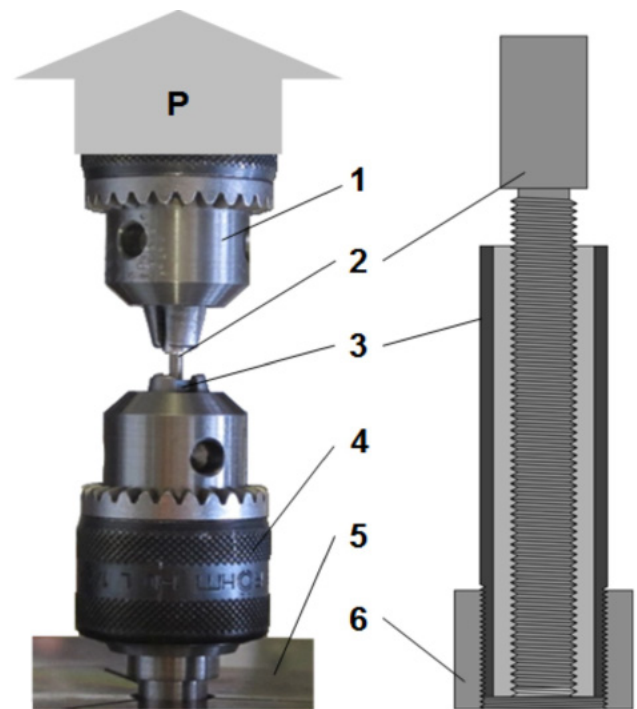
Scheme of the pull-out test of the double-layered aluminium tubes: 1 – upper chuck; 2 – steel screw; 3 – double-layered tube; 4 – lower chuck; 5 – chuck jaw of the tensile test machine; 6 – cylindrical aluminium nut; 7 – cylindrical adapter
